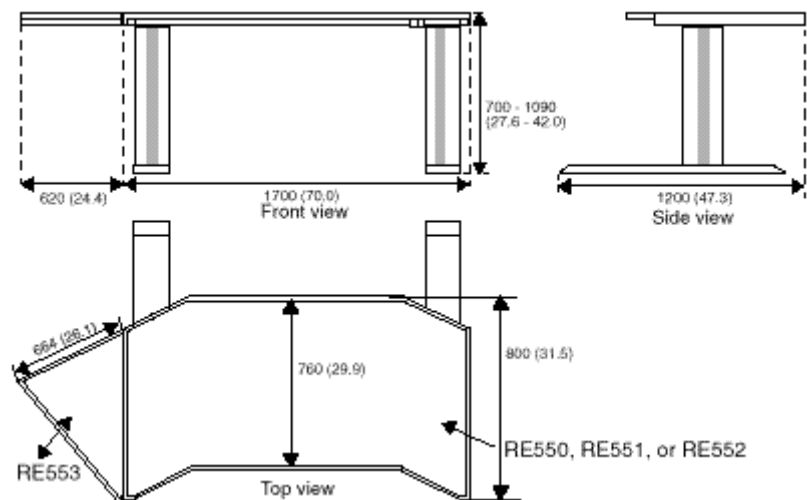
Operator Table with Extension Table (measurements in mm and inches)
